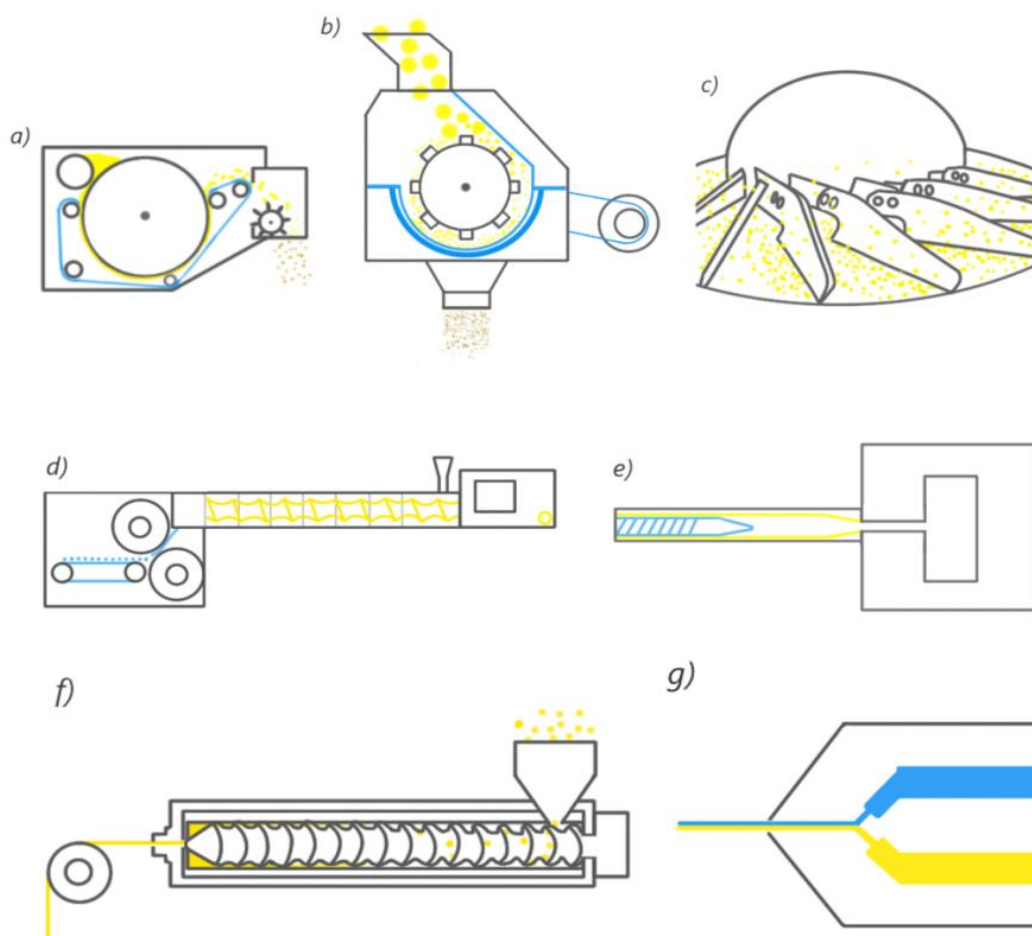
Downstream processing equipments: a) cooling calender; b) mill; c) pelletizer; d) shaping calender; e) injection molding; f) film extrusion; g) co-extrusion.
